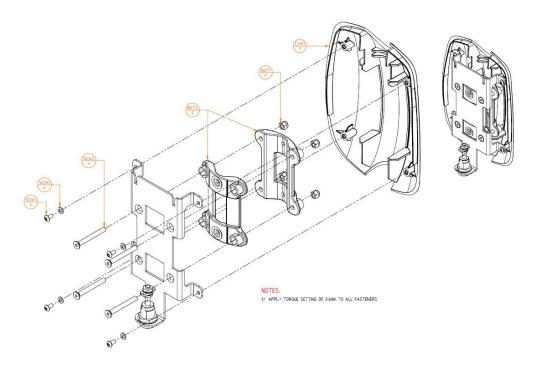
PROD0059 Cradle Assembly (45-0710) Page 2
